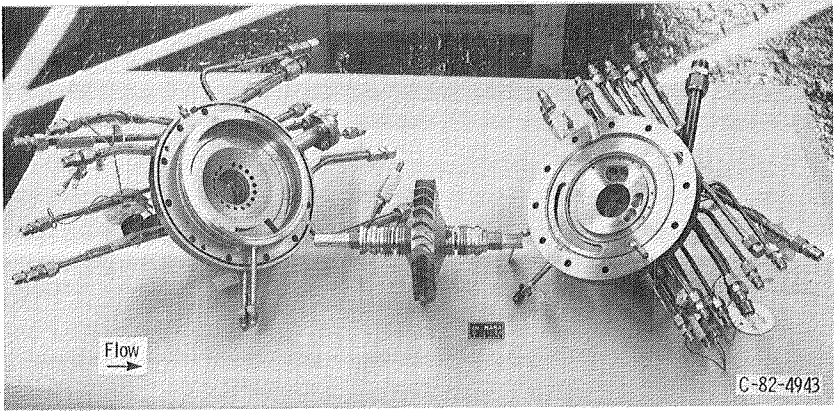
Disassembled turbine with the two halves of the housing and the rotor with its replaceable blades. Not shown is the stator-flange assembly.
